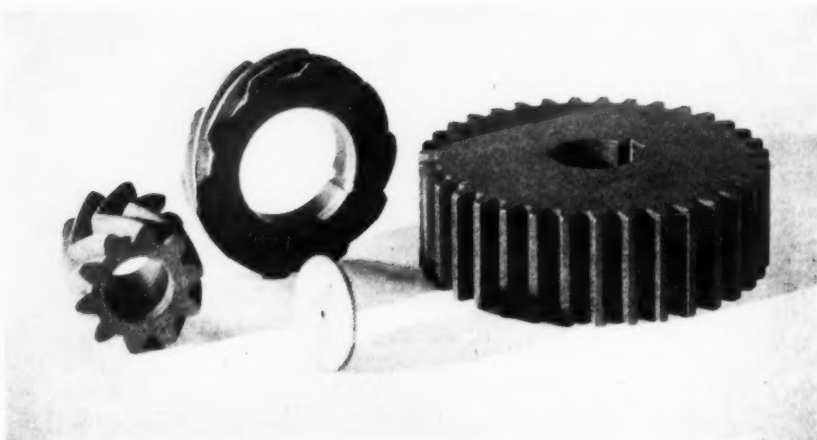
Laminated Phenolic Gears that have been Formed Completely by Machining
